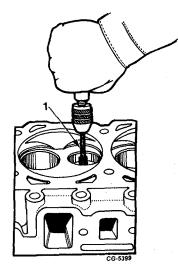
Valve Guide Cleaning Tool 1. Cleaning tool
